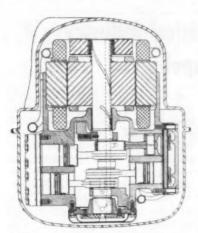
This shows a 5-ton welded hermetic Tecumseh compressor.
